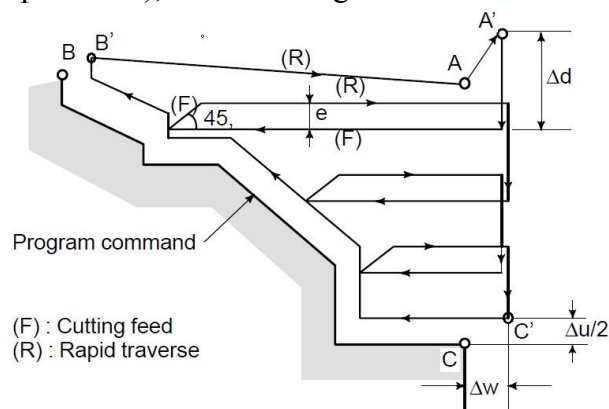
Cutting Path in Axial Roughing Turning Cycle
